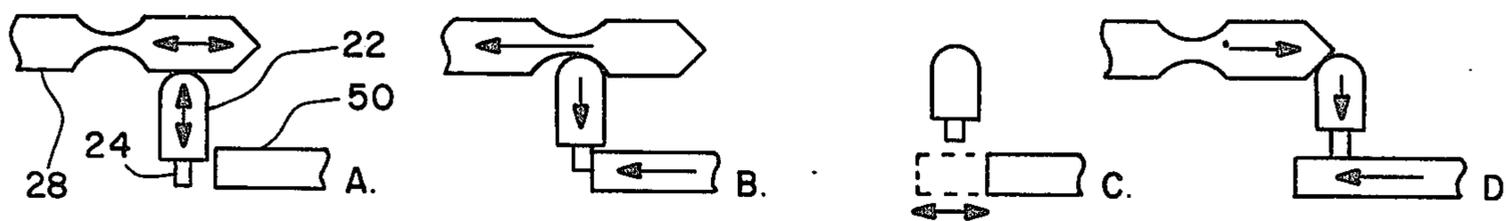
LINEAR SLIDE PRINCIPAL - RIGHT ANGLE
